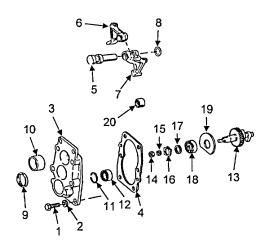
TIMING COVER CAMSHAFT ASSEMBLY
